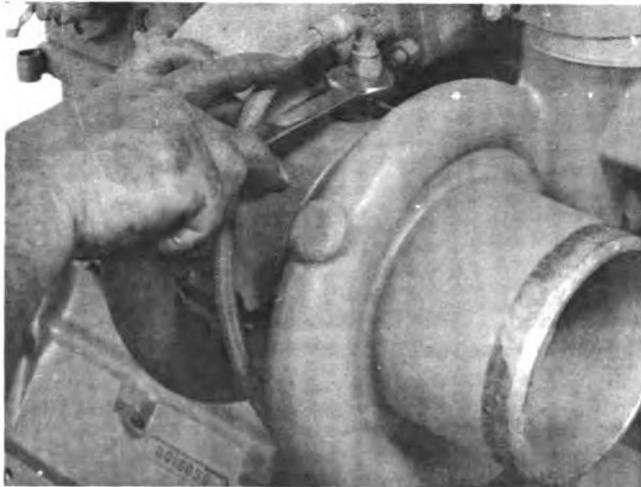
Remove The Turbocharger Oil Supply Line.
